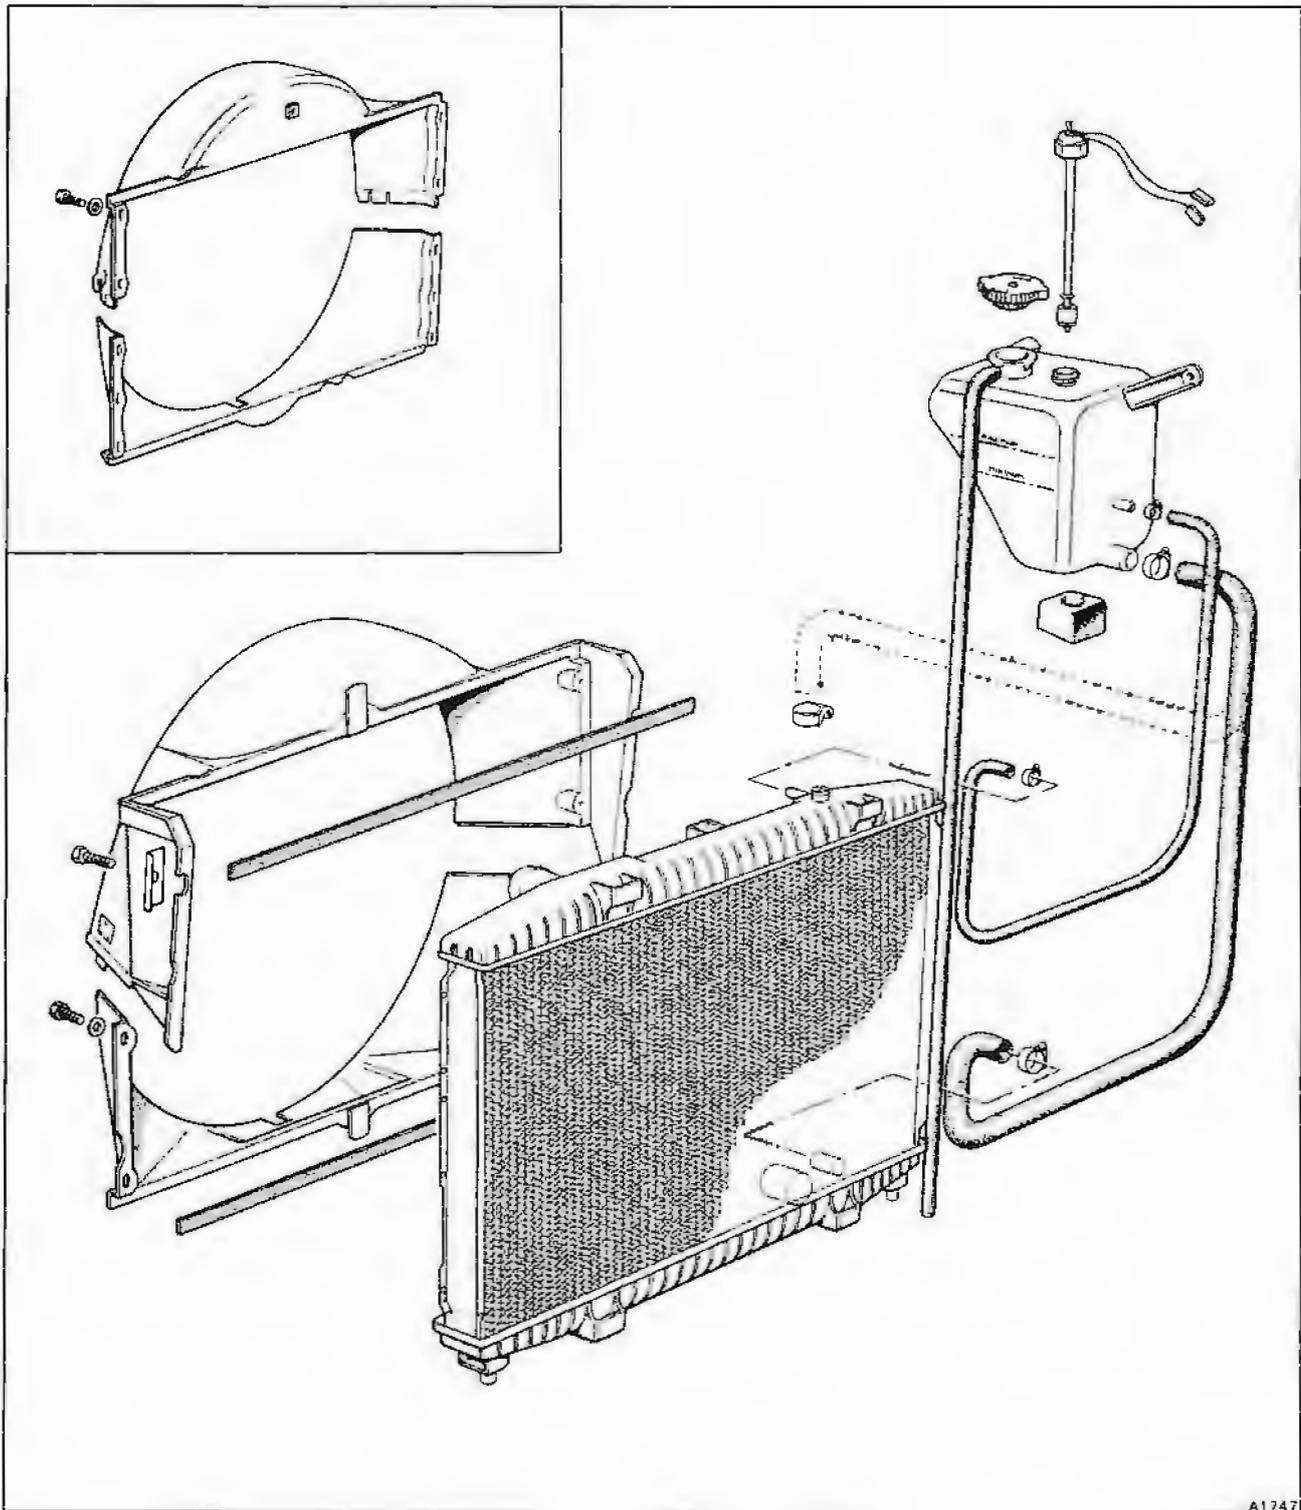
Radiator and expansion bottle Inset – Fan cowl (Two door cars) Dotted line – 1989 model year cars
